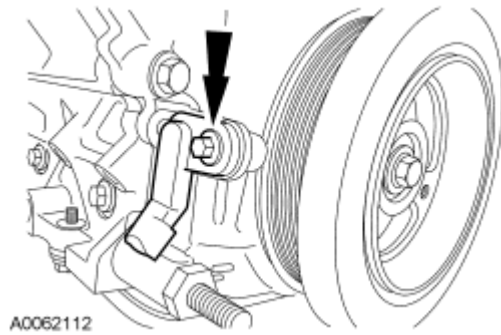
Locating Crankshaft Position (CKP) Sensor Bolt
